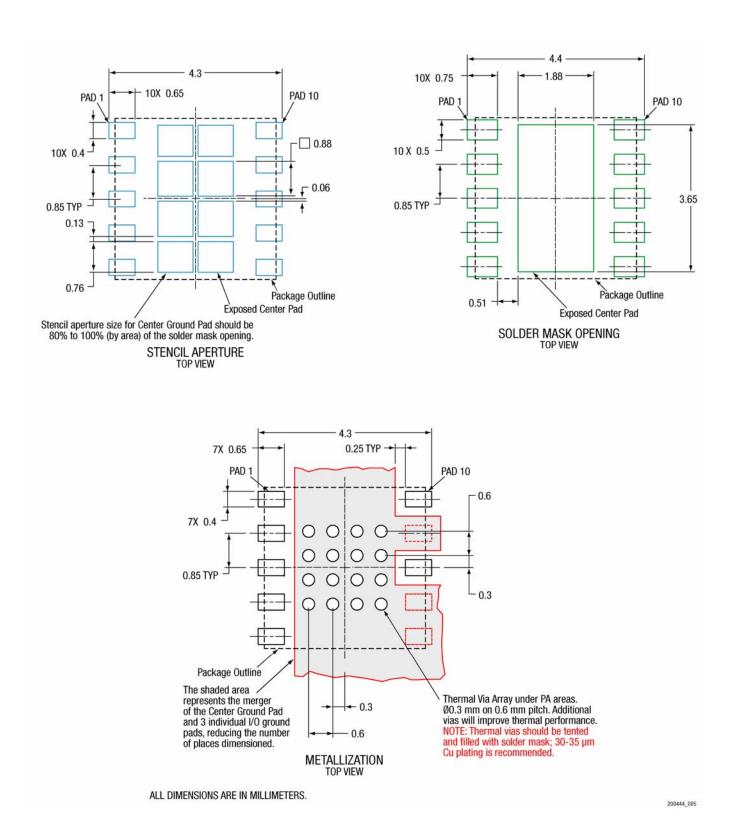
Phone PCB Layout Footprint for 4 x 4 x 1.1 mm, 10-Pad Package - SKY77174
